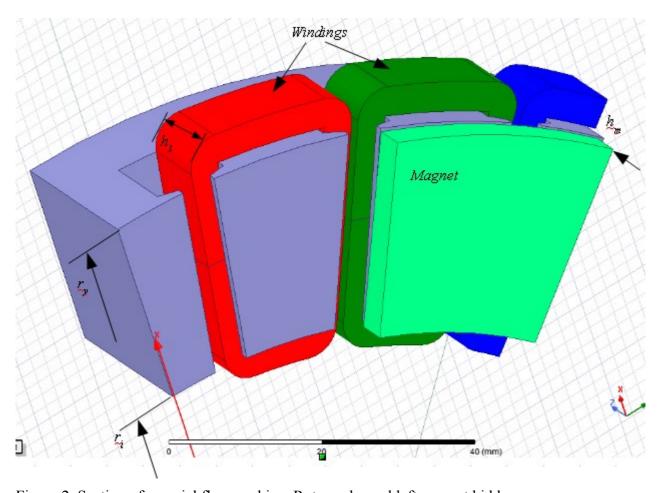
Section of an axial flux machine. Rotor yoke and left magnet hidden.
